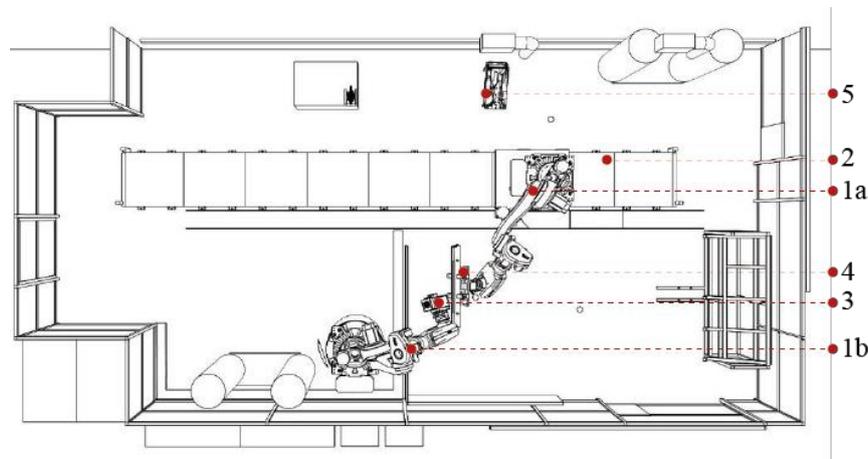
Top view of layout of robotic fabrication platform: 1a _Gripped Robot; 1b _Fixed Robot; 2_Track; 3_Milling head; 4_Pneumatic gripper; 5_Circular saw [10]
